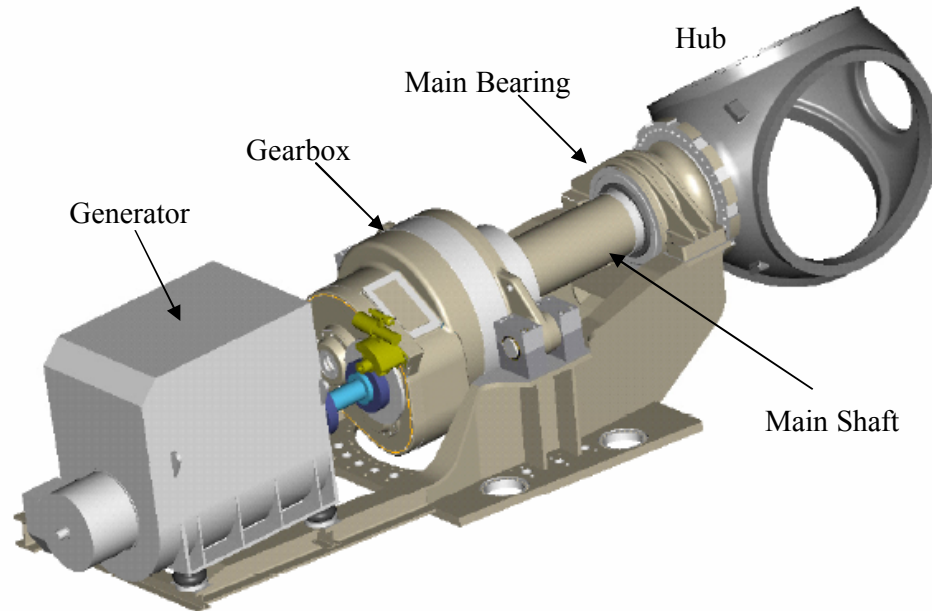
Transmission system consisting of hub, one main bearing, main shaft, gearbox and generator
